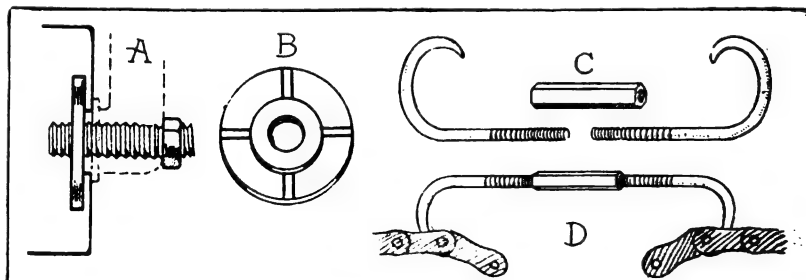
A, Ingenious Repair of a Water Intake Manifold for Copper Cylinder Jacket; B, the Corroded Jacket Spider That the Threaded Plate Replaced; C, Members of a Practical Chain Clamp; D, the Clamp as Used.
